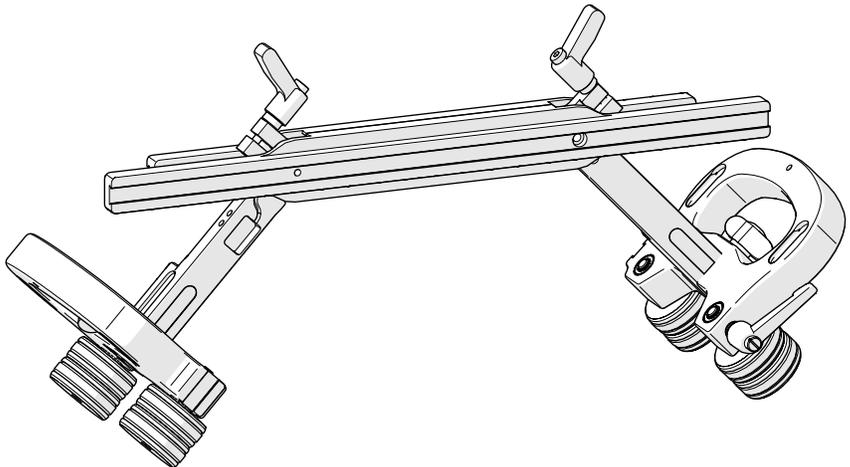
Wheel block with handle, wheels facing outward, handle flush with frame bar
